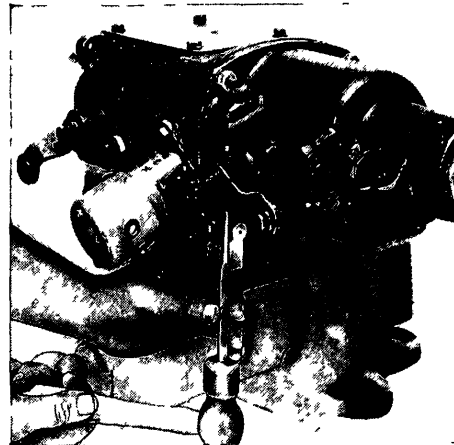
After driving out latching pin, pull shift shaft as far as possible to disengage operating cam from shift rail. Remove overdrive housing using. Tap and f shaft to prevent its coming off with housing and spilling free wheel rollers. Parts inside housing may then be removed
